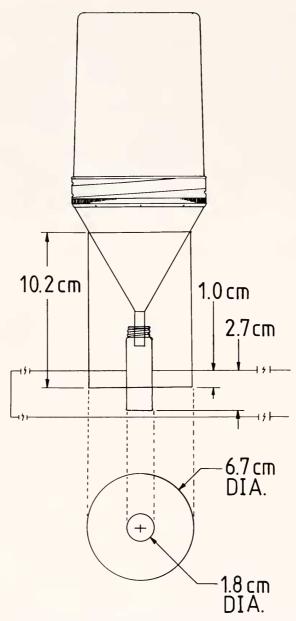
Dimensions of board designed to hold target vial and metal can.
